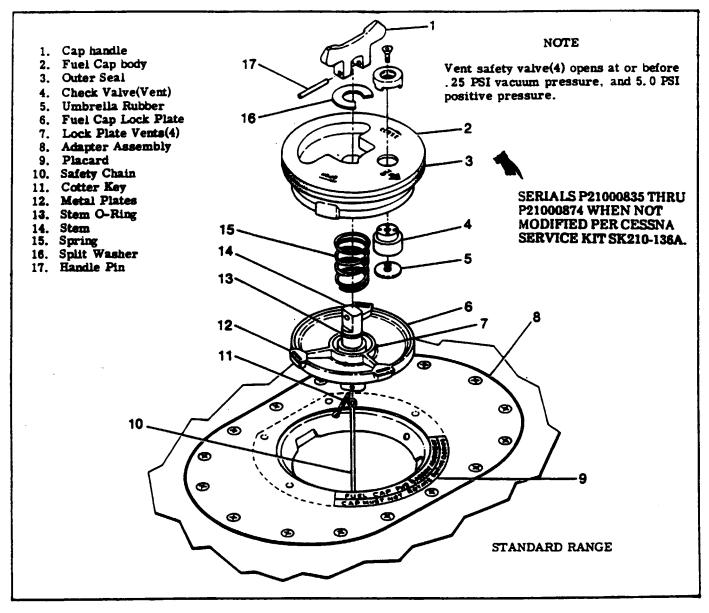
Fuel Filler Cap (Sheet 1 of 2)
